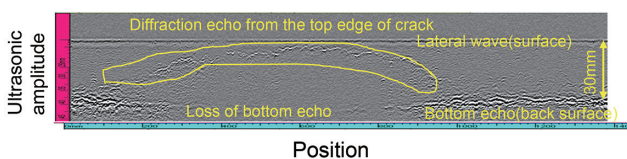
Cross-sectional image of crack height detection in weld by TOFD
